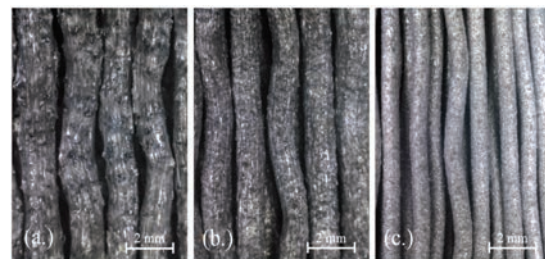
abrasive filament Tool A (a.), Tool B (b.), and Tool C (c.).
